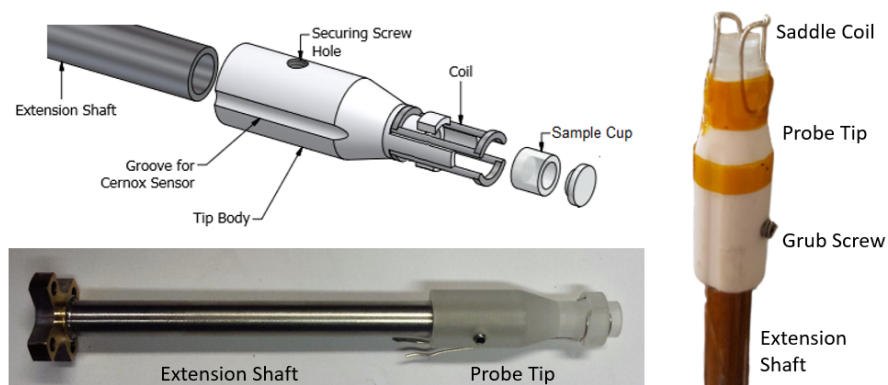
The probe tip, holding the sample cup and NMR coil, is screwed onto the extension shaft. The image at the *bottom* shows an older design of the tip, whilst the updated image on the *right* shows the final design. The Cernox sensor is attached using cryogenic tape.
